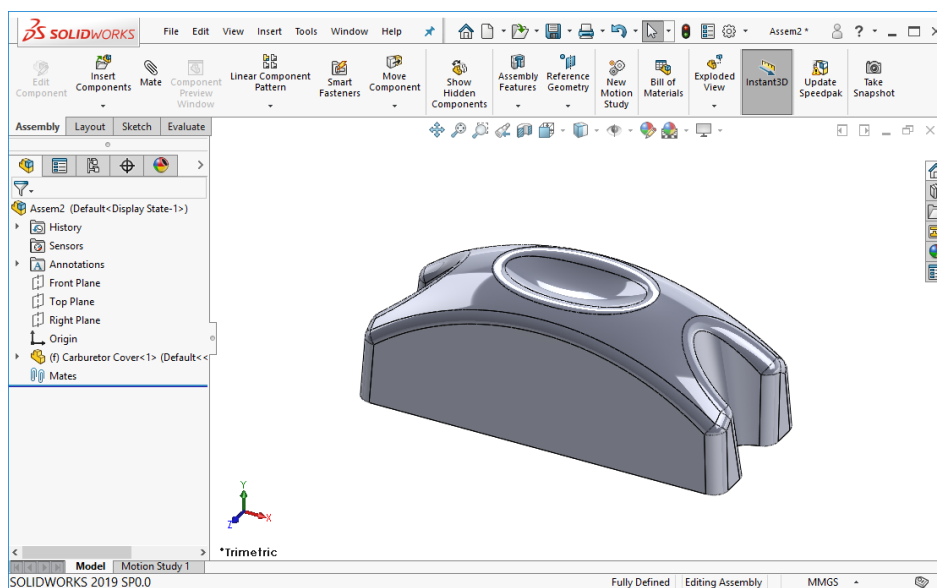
Carburetor Cover placed coincident to the assembly origin
